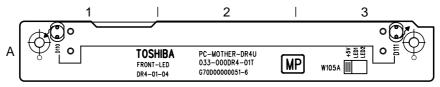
EU56 Front (LED) PC Broad (Top side)
